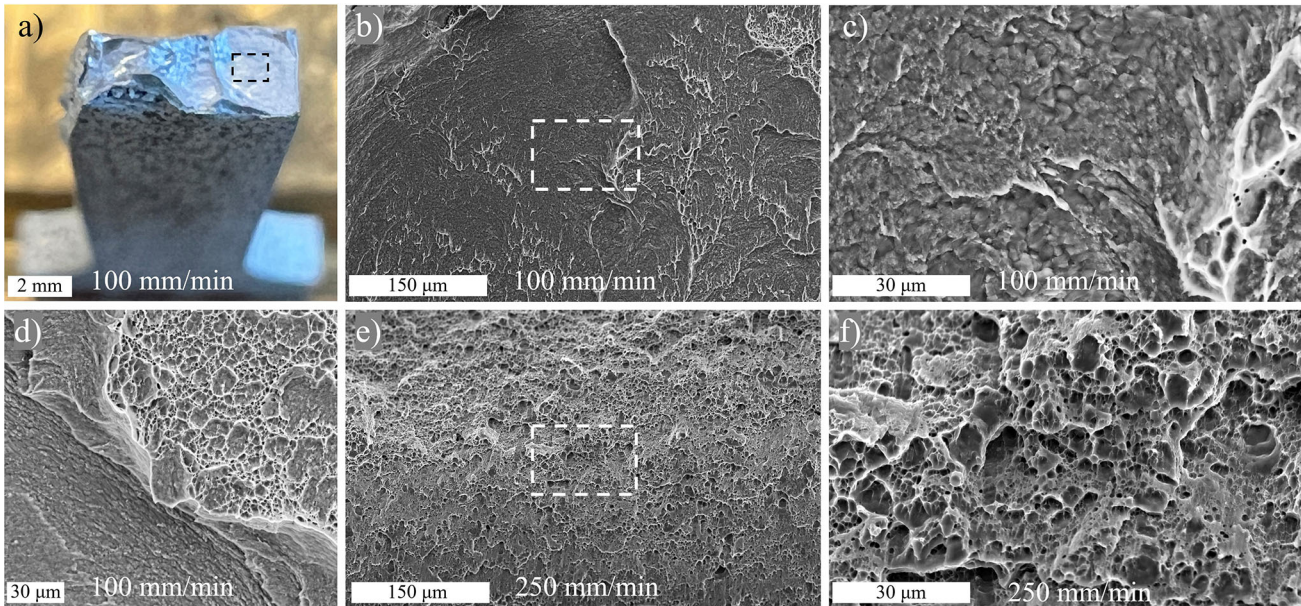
(a) Macroscopic image of fractured tensile sample of the 100 mm/min build in vertical direction, showing small deformation and necking area. (b) Fracture surface of 100 mm/min sample performed on the rectangular black dashed area in (a), representing shear-like fracture. (c) More detail of the area indicated by white dashed rectangle in (b). (d) Two different modes of fracture, known as dimple fracture and shear-like fracture, next to each other in the 100 mm/min sample. (e) Fracture surface of 250 mm/min sample. (f) More detail of the area indicated by white dashed rectangle in (e), showing a dimple-rich fracture surface (Color figure online).
